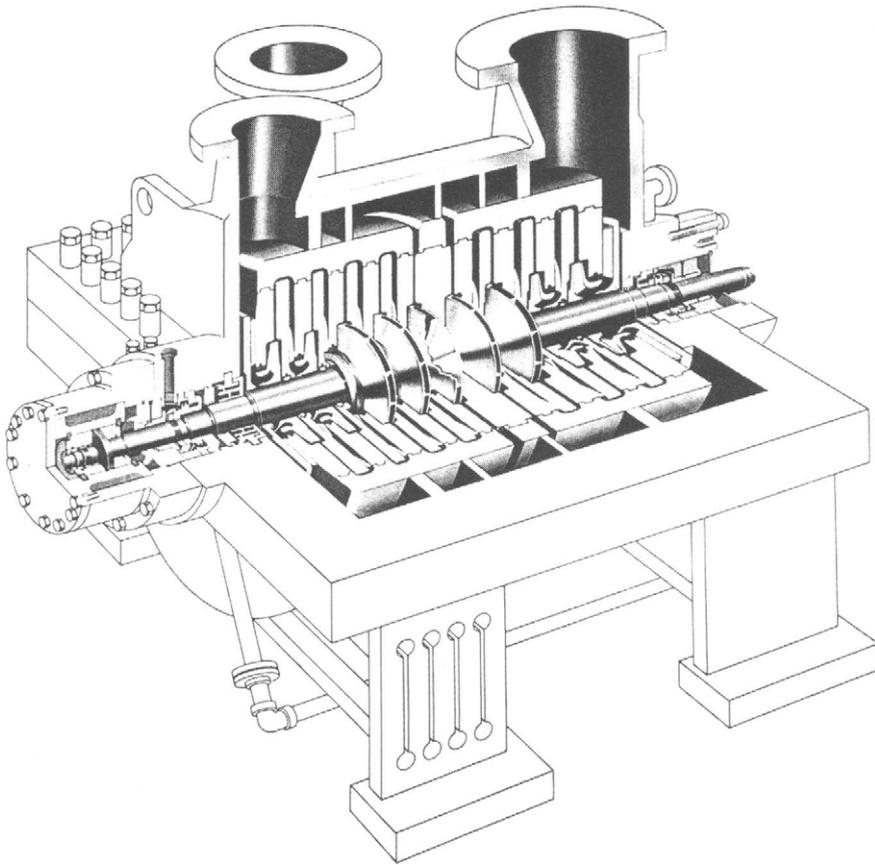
Cutaway of horizontally split fabricated compressor (Courtesy of IMO Industries Inc)
